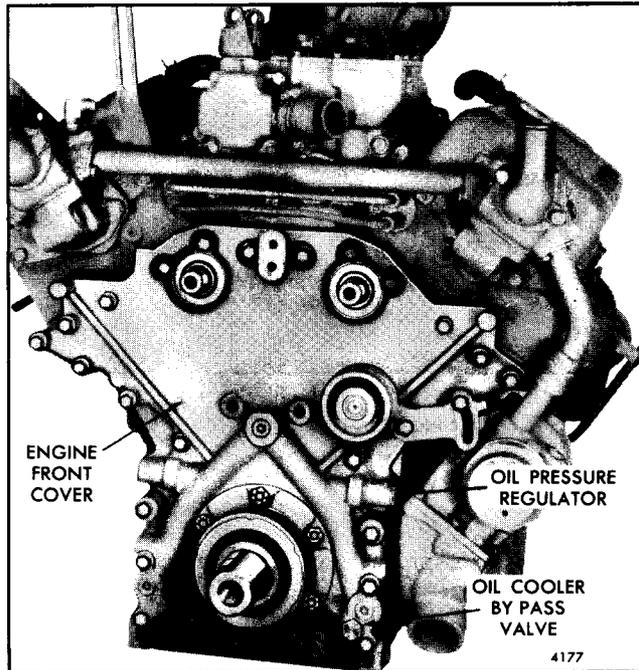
Location of Oil Pressure Regulator (8V Engine)
